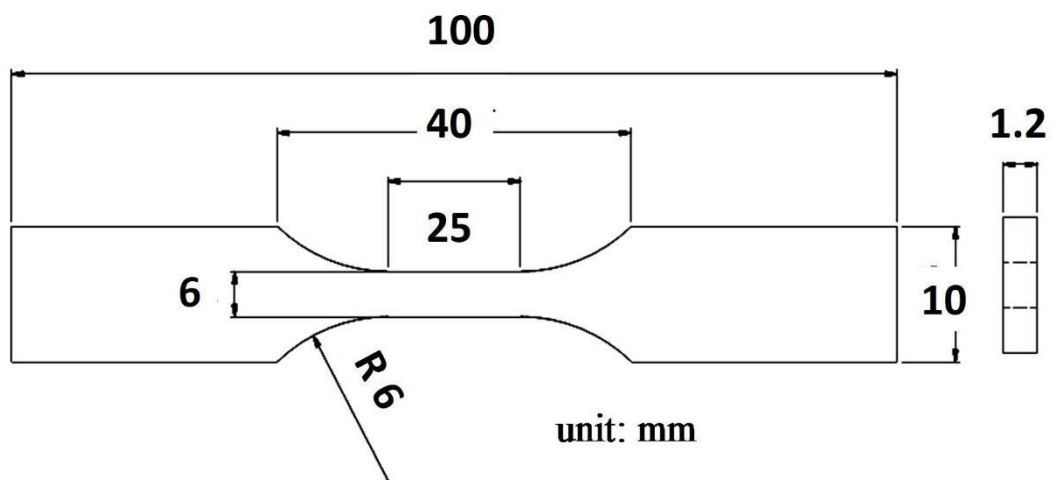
Tensile dimensions of the DCI specimens (ASTM E8 standard).
